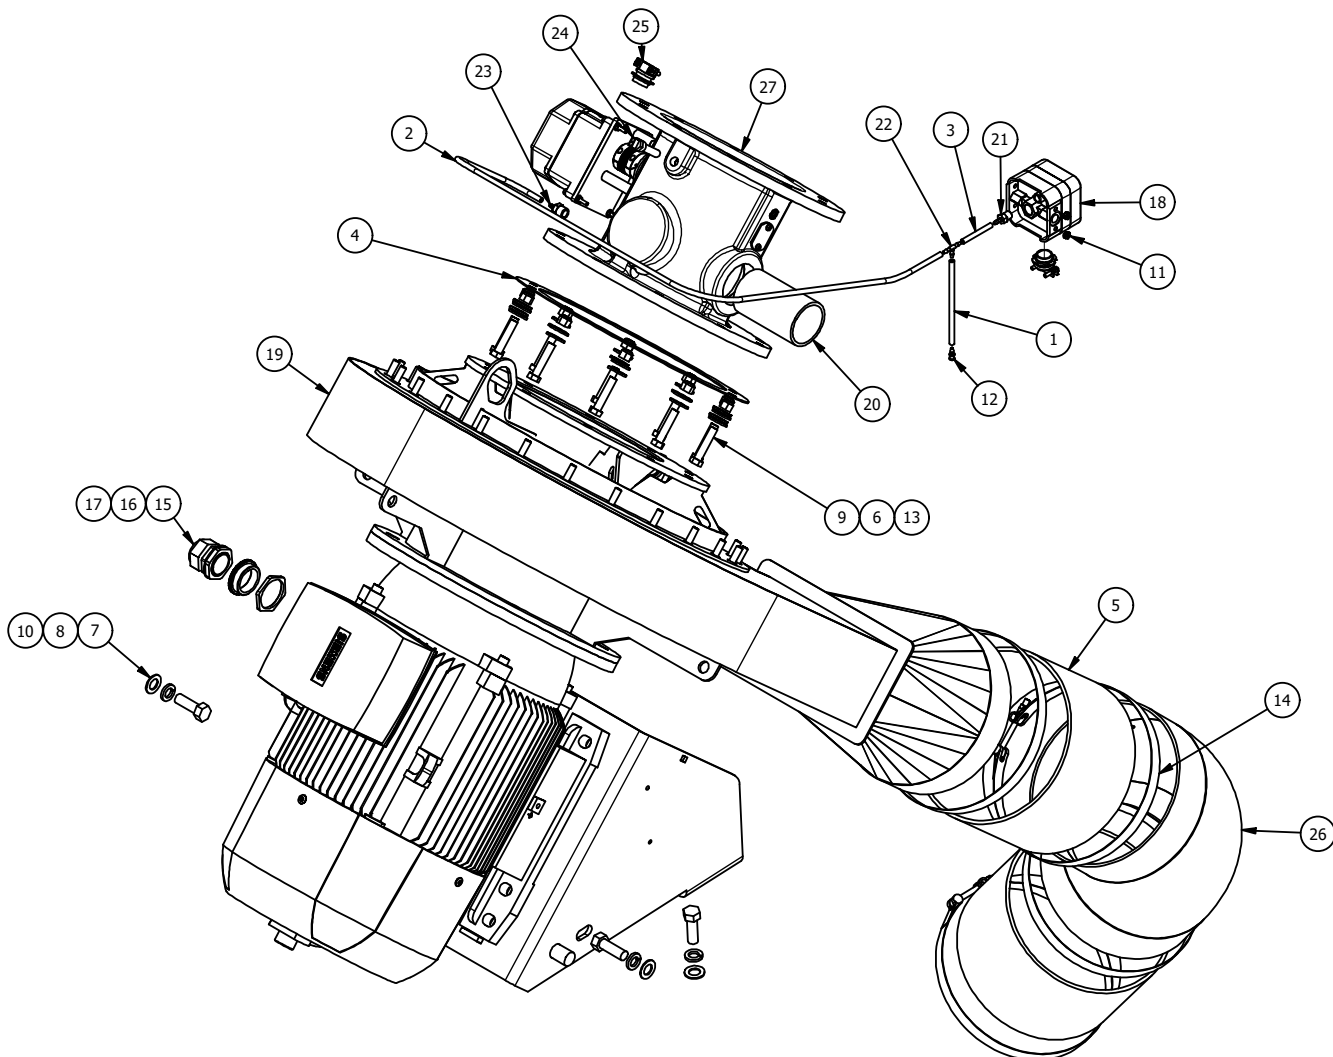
PRE-MIX ASSEMBLY (EXE-4000-6000)
